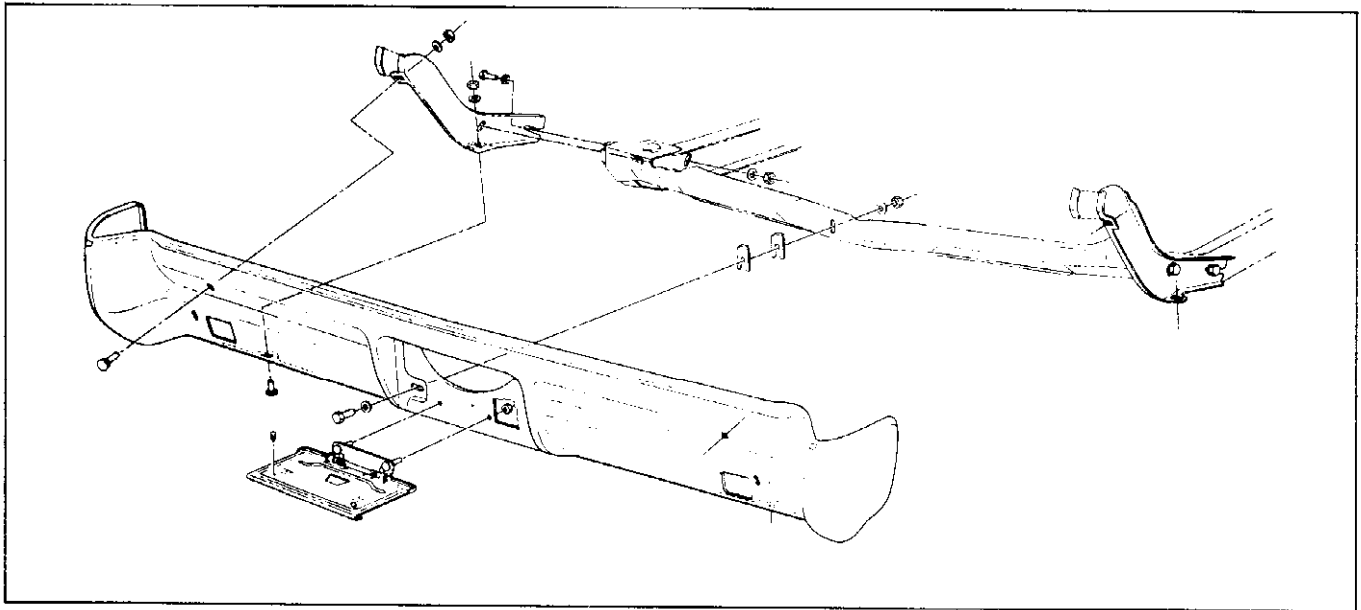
Rear Bumper Assembly (Pontiac)
